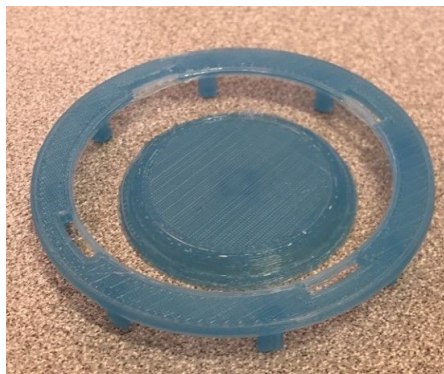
D Printed Parts for Moving Magnet Assembly - First Iteration
